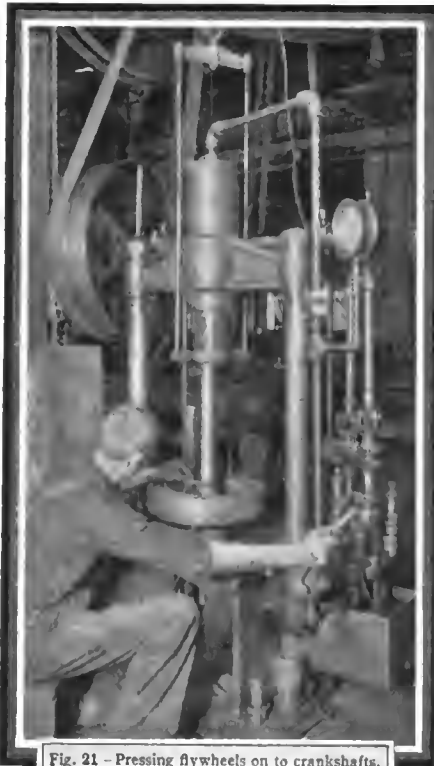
Pressing flywheels on to crankshafts, using about fifteen tons pressure and a hydraulic press
